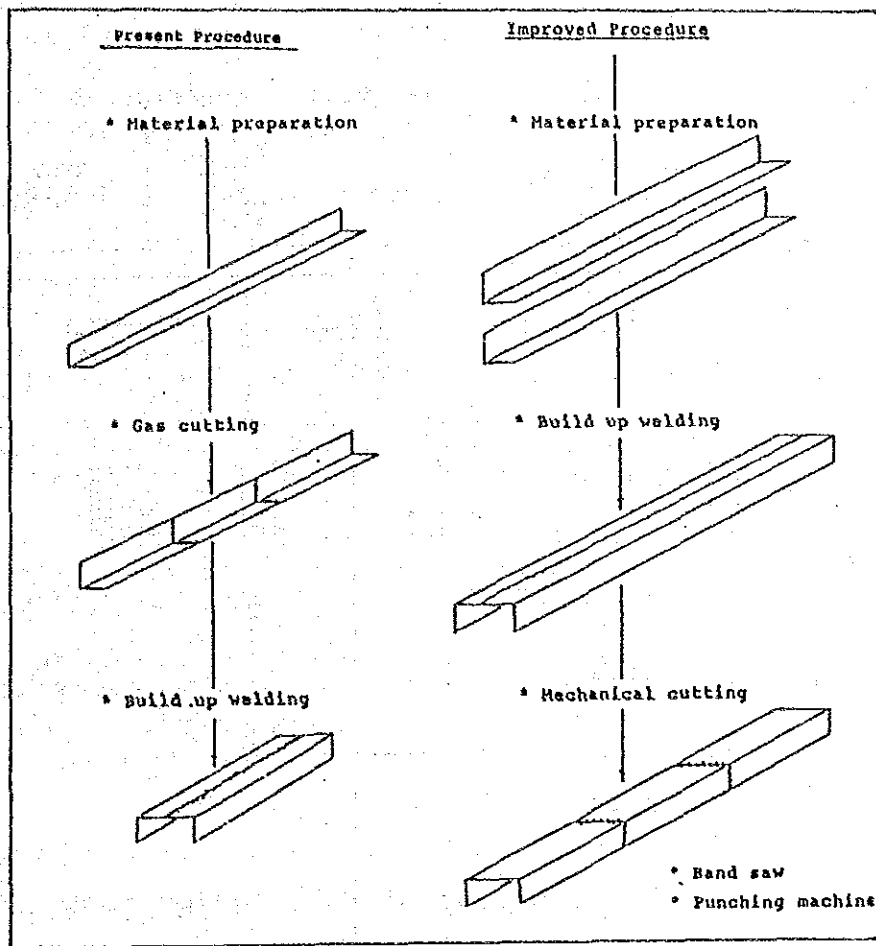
Channel Shaped Bar Assembled by 2 Section Bars
